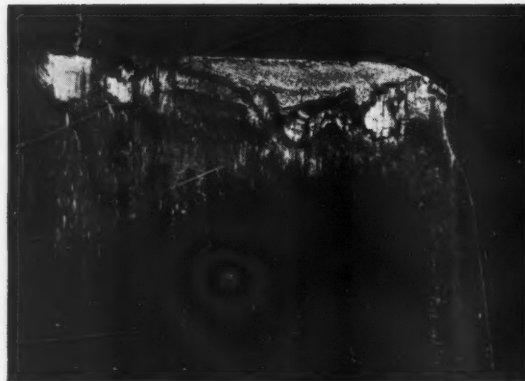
Damage to rake face of tool caused during machining Nimonic alloy (X15).
